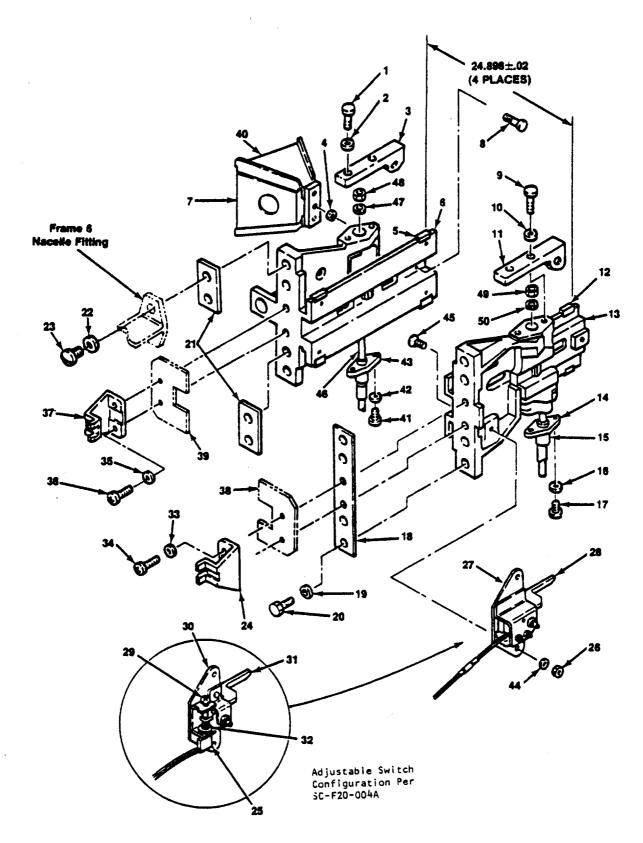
Pinion Gearbox Disassembly (Sheet 1 of 2)
